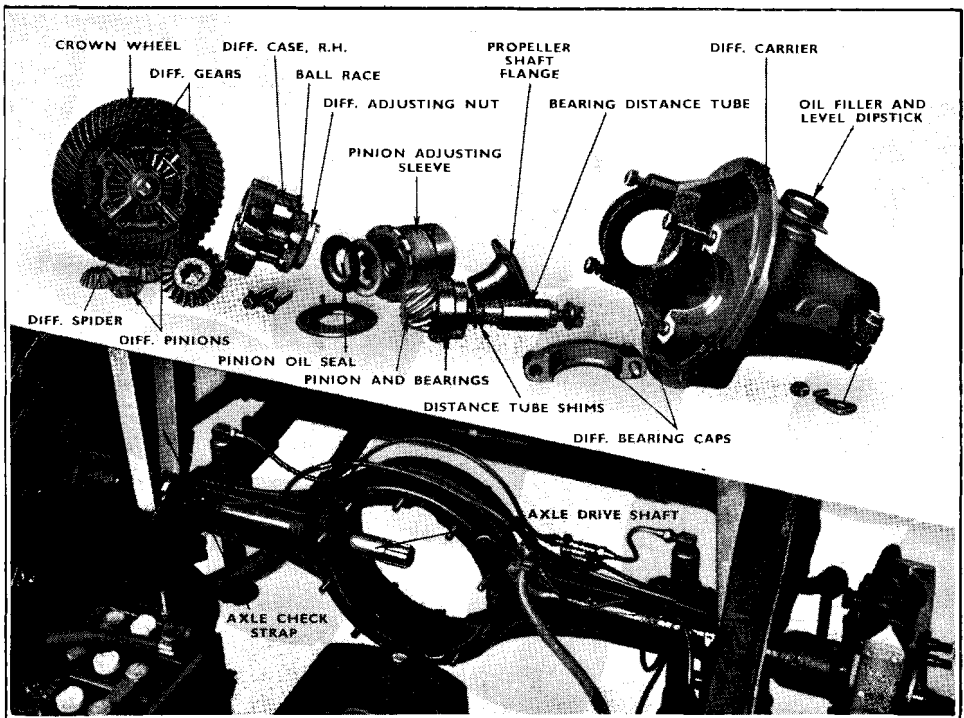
Illustration No. 2.—The rear axle—top pictures showing differential assembly dismantled, and below, the axle casing. Note the drive shaft, also the pipe lines to the brakes and jacks.
